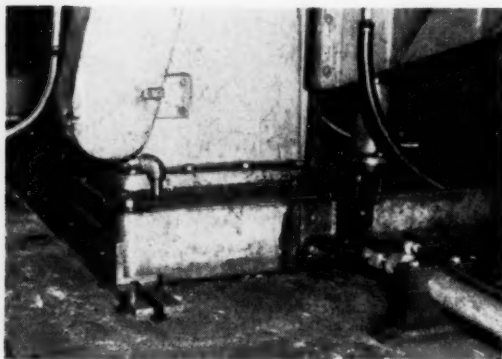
The base of the adjustable drill press is provided with keyed support angles to prevent wear of the machine base. Note top of "Goodman" T-rail extending above concrete floor level. At the right, the rod end of the cylinder is visible. The cylinder, because of its slender structure, is supported from the floor by means of a steel bracket.
